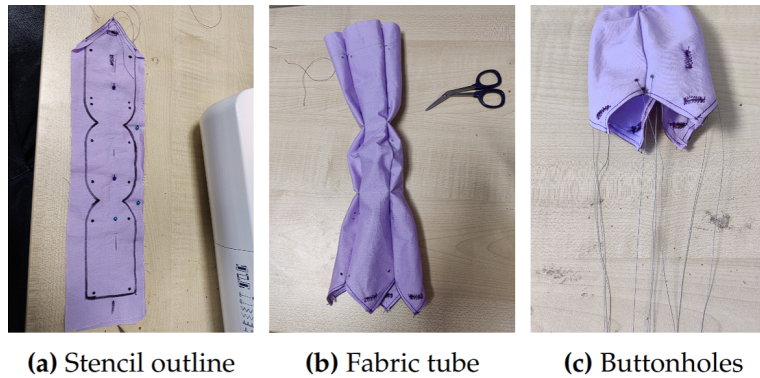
(a) Stencil outline and fabric markings (b) Fabric tube, turned inside out (c) Close-up of Buttonholes and string ends
